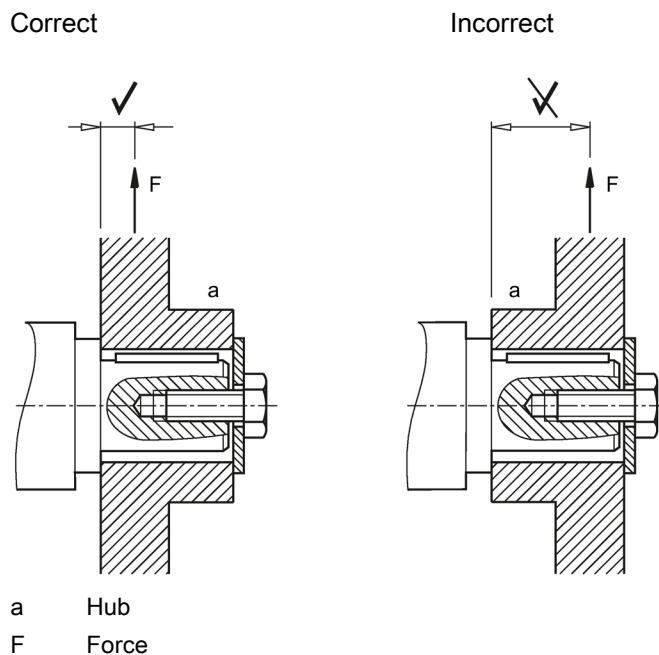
Mounting arrangement for low stress on shafts and bearings
